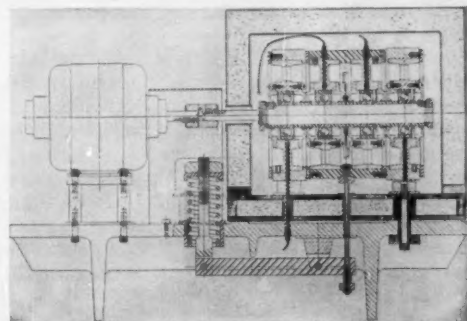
sectional view of G.E. Four-Bearing Interchangeable Cartridge High-Temperature Ball Bearing Grease Tester. (reprinted from article "Grease—An Oil Storehouse for Bearings" by D. F. Wilcock and M. Anderson, Symposium on Functional Tests for Ball Bearing Greases, STP-84, ASTM³).
